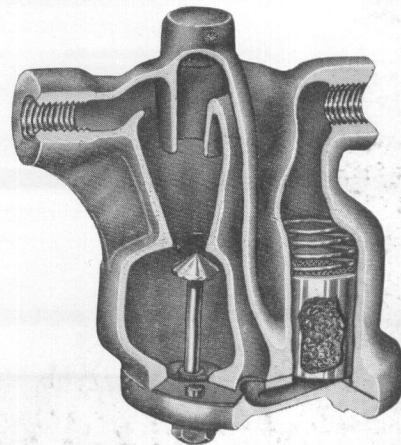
Centrifugal Dirt Collector and Strainer. Similar to Fig. 1 but incorporating a hair strainer and a removable cover plate which gives access to both the collector chamber and the strainer for emptying.
